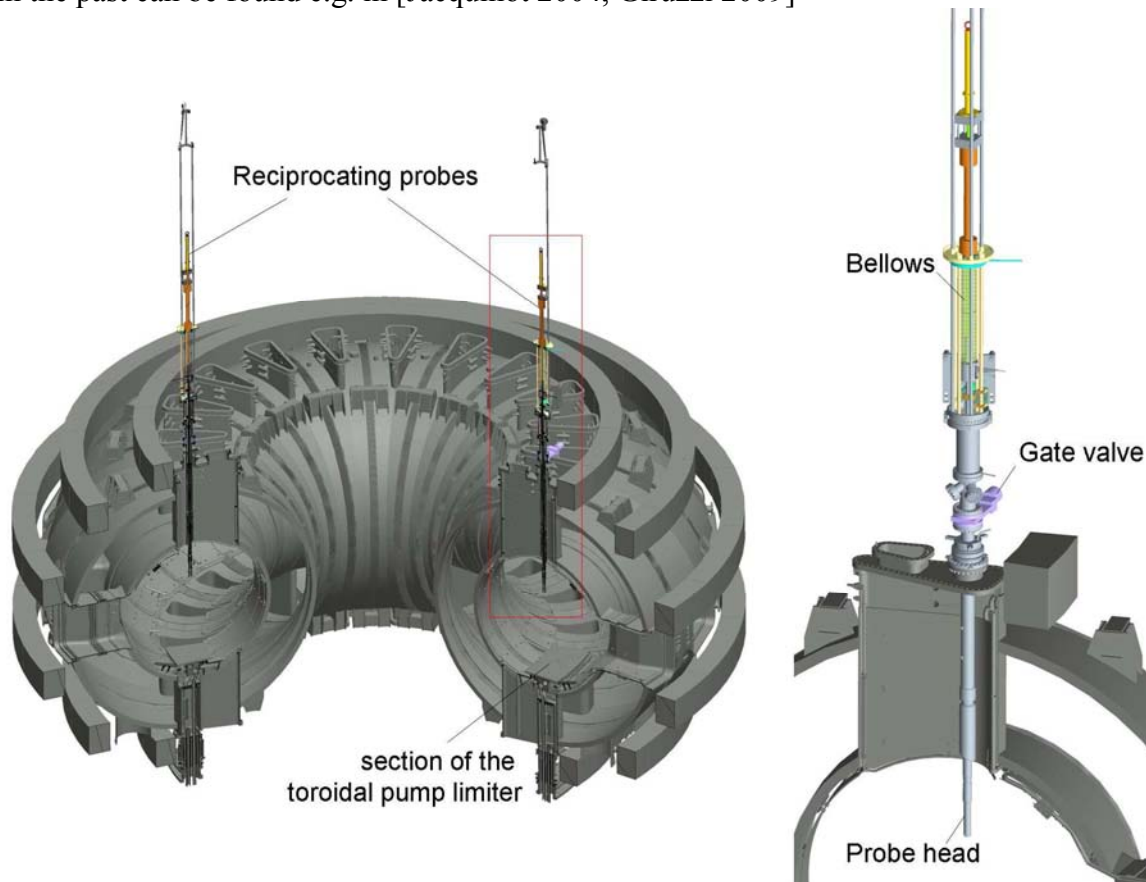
Left: Schematic view on the Tore Supra vacuum vessel with two reciprocating probes drives. Right: a detail view on the reciprocating probe system.
